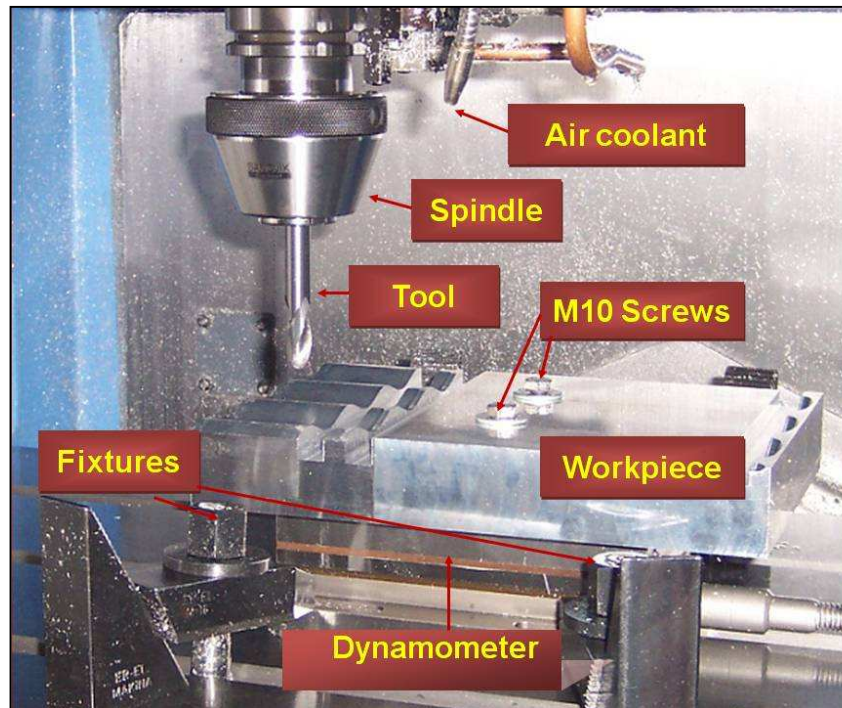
Workpiece and 3-component dynamometer fixed to VMC table for cutting tests
